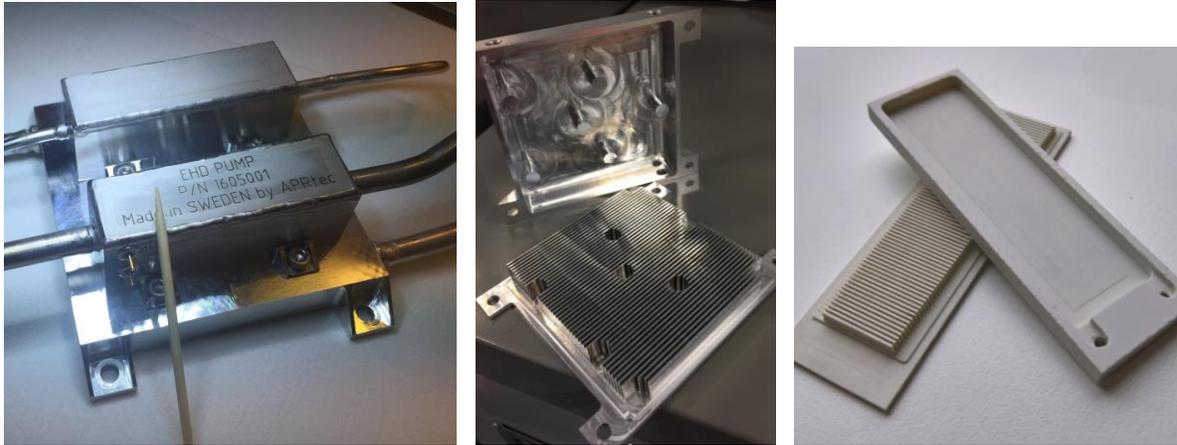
Left: Cold side heat exchanger assembly. The cold side heat exchanger carries the liquid expansion chamber (top) and EHD pump (bottom). A tooth pick has been added for scale. Center: Cold aluminium heat exchanger before assembly. Right: Shapal heat exchanger before assembly.
